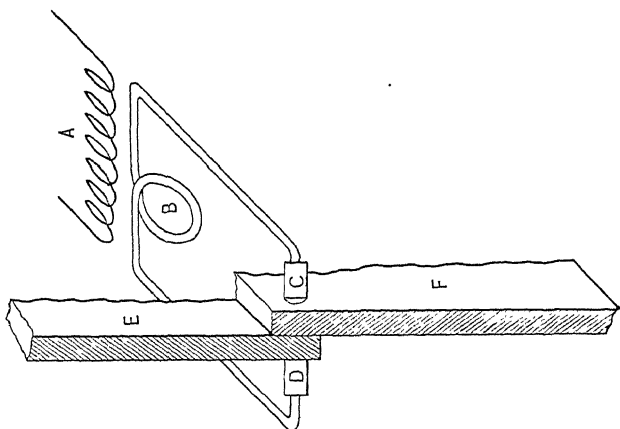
WIRING DIAGRAM OF PORTABLE SPOT WELDER WITH 27-IN. GAP.
